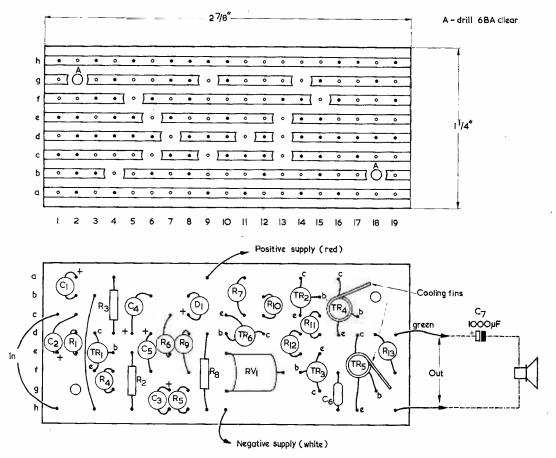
The copper and component sides of the Veroboard on which the amplifier is assembled
